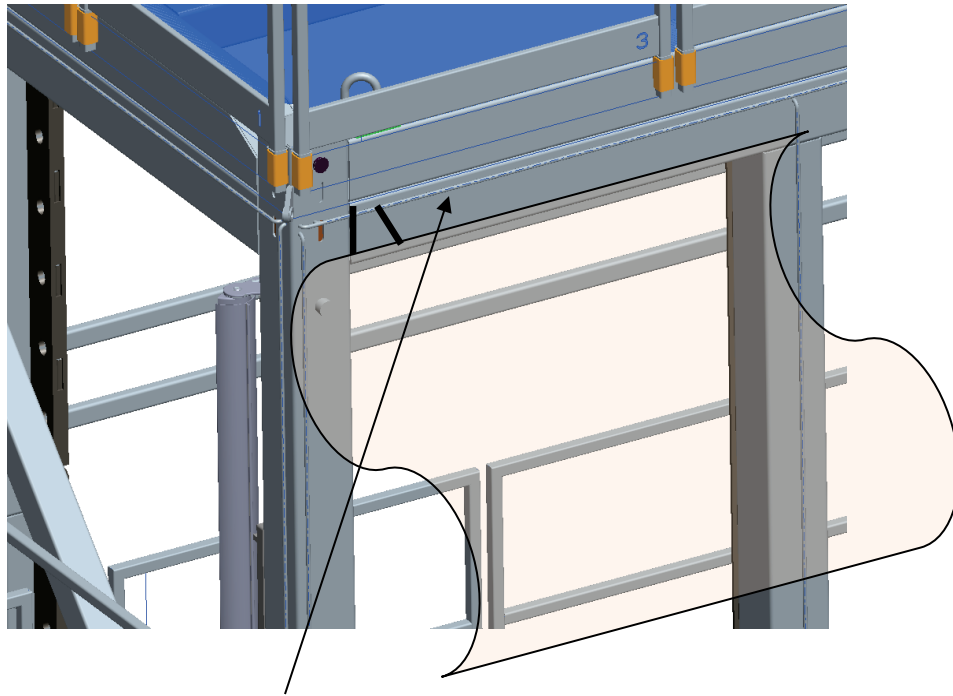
, 57½" Plank Assembly to Fill a Gap with Six (6) Horizontal Planks Removed
